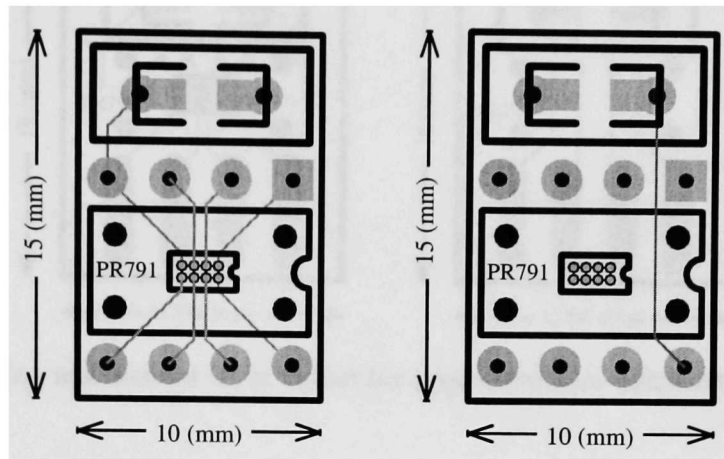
Top and bottom layer layout for DIP adapter board PR791
